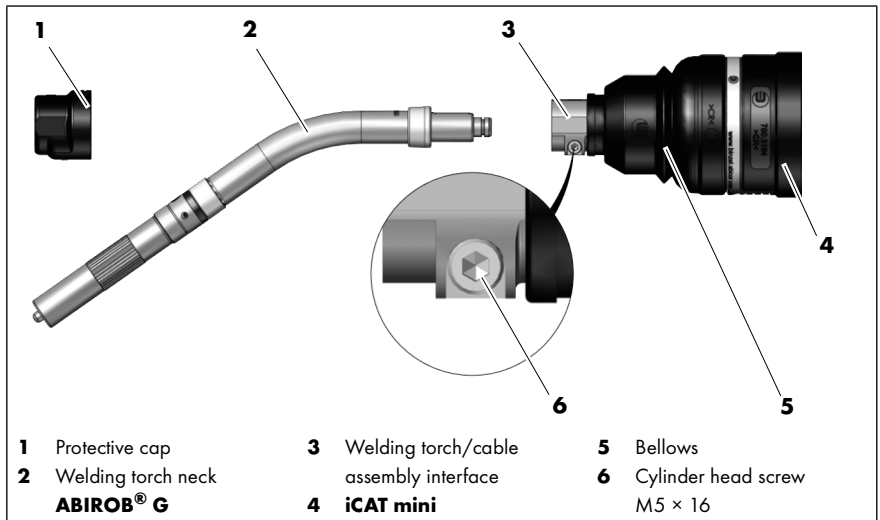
Mounting the welding torch neck ABIROB® G
